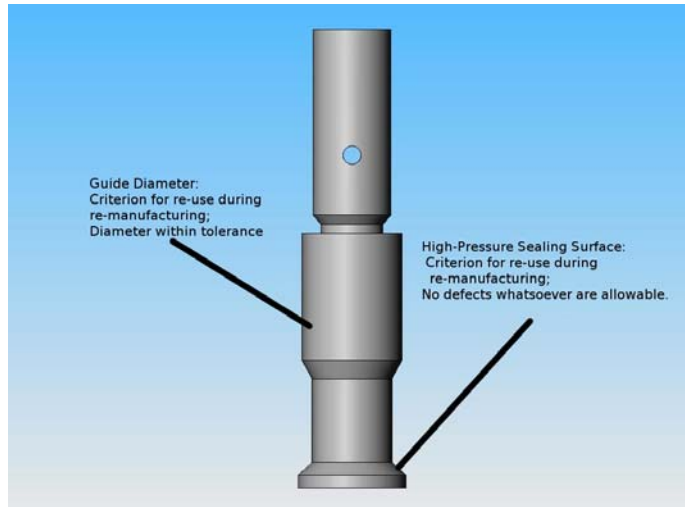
Surfaces of “used” Poppet Control Valves that are inspected during Re-manufacturing.
